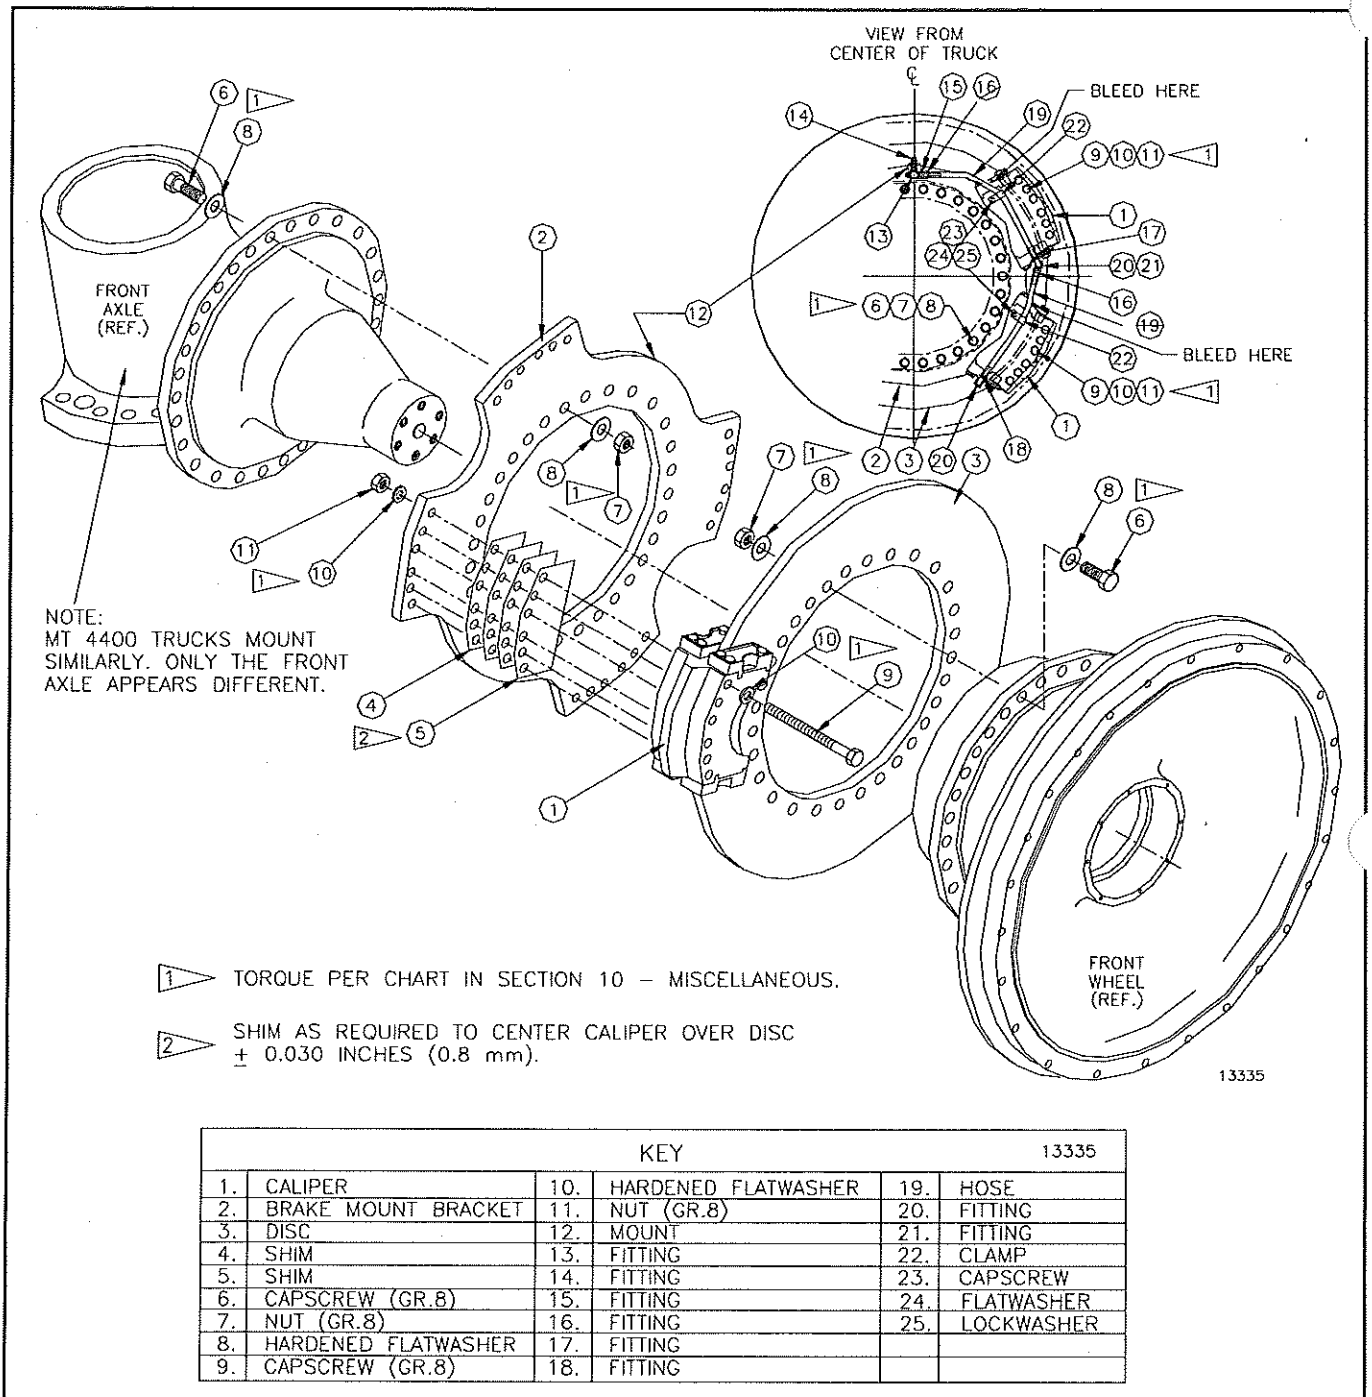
TYPICAL QUAD CALIPER FRONT DISC BRAKE ASSEMBLY - MT 4000 AND 4400
